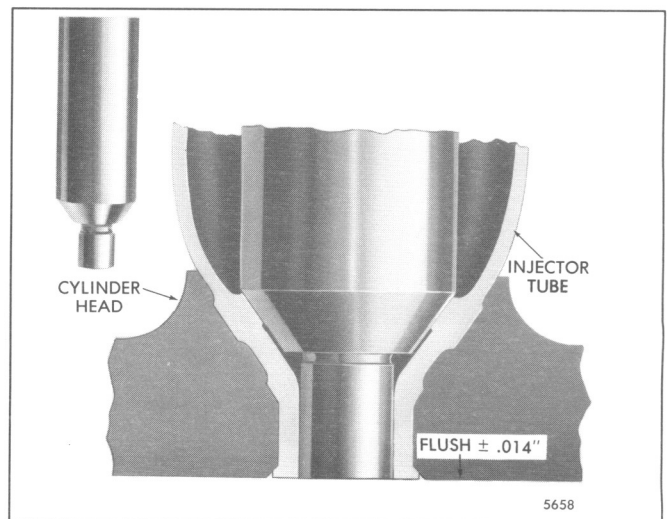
Measuring Relationship of Gage to Fire Deck of Cylinder Head with Tool J 25521
